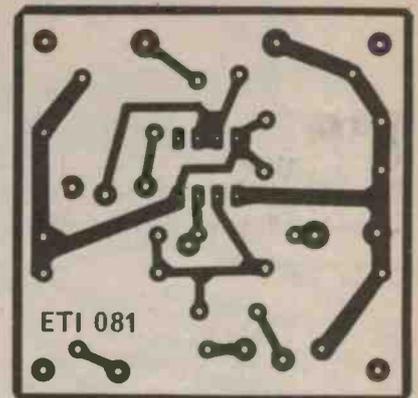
Printed circuit layout. Full size 50 mm x 50 mm.
